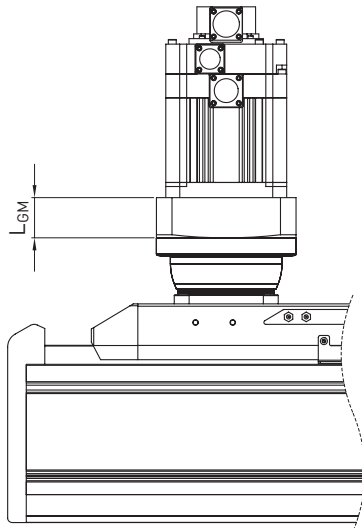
Motor connection of linear module HM-B without gearbox
